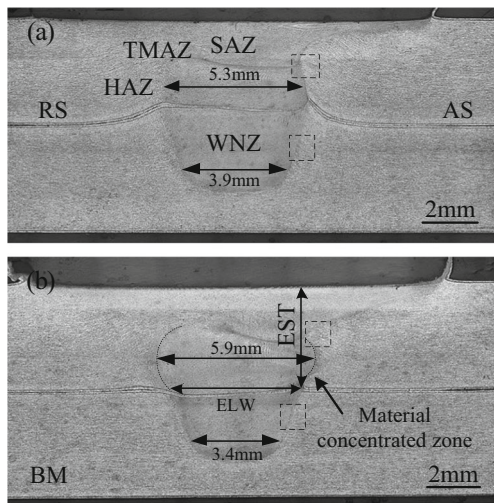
Cross sections of the lap joints using the full-threaded pin (a) and the bottom-half-threaded pin (b)
